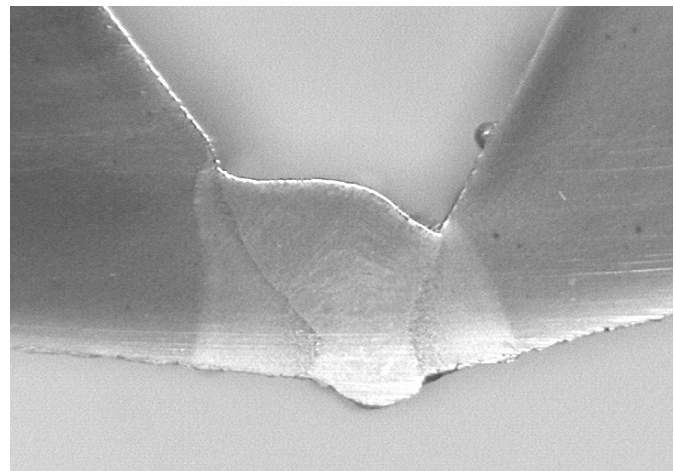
Synchrowire GMA weld in 8mm X80 plate.
